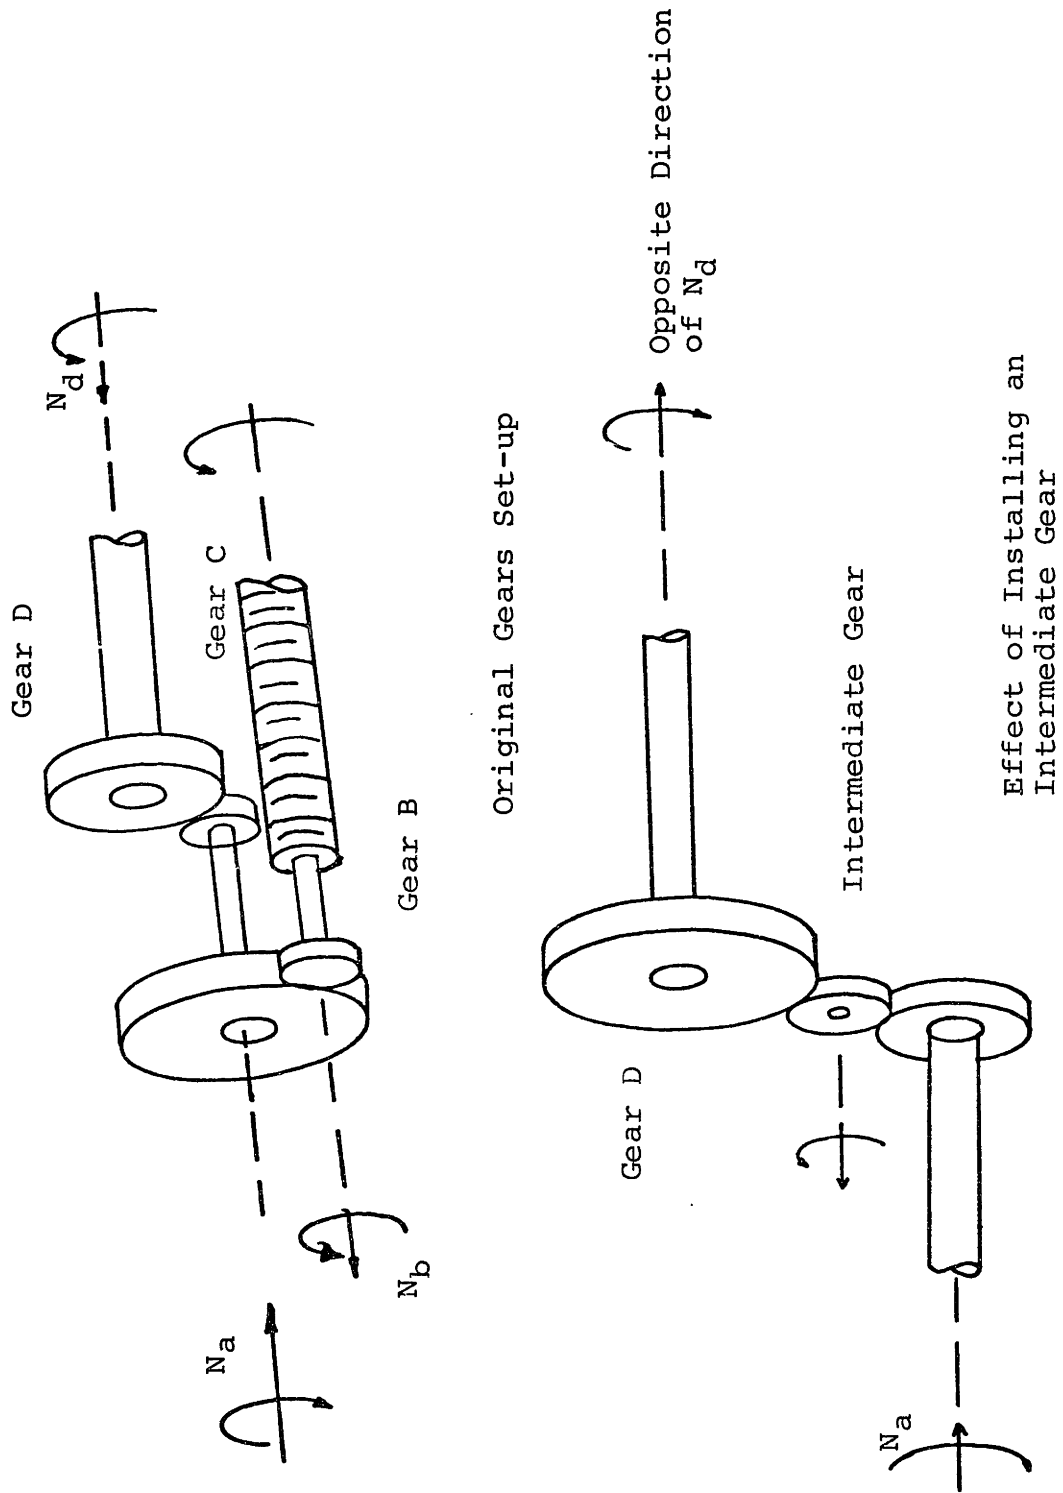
Gear Set-up for the Wire Wrap Machine
